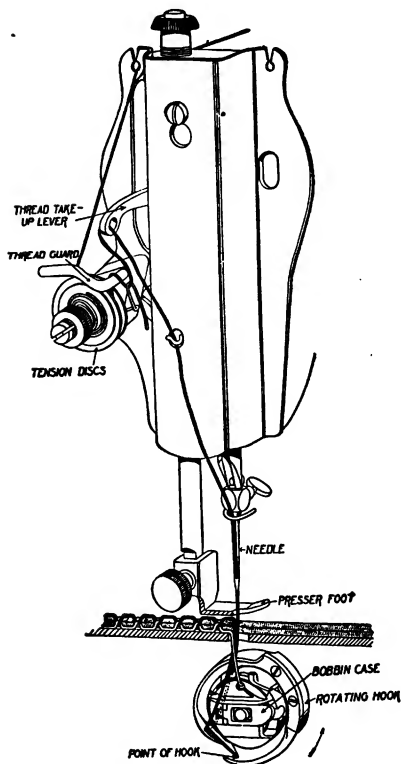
Position of the tension on the 115-1 and 15-30 Singer machines.
